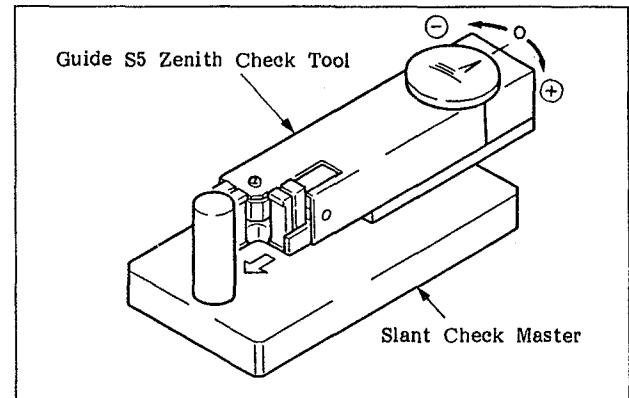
Preparation that Must be Made before Making Adjustment
